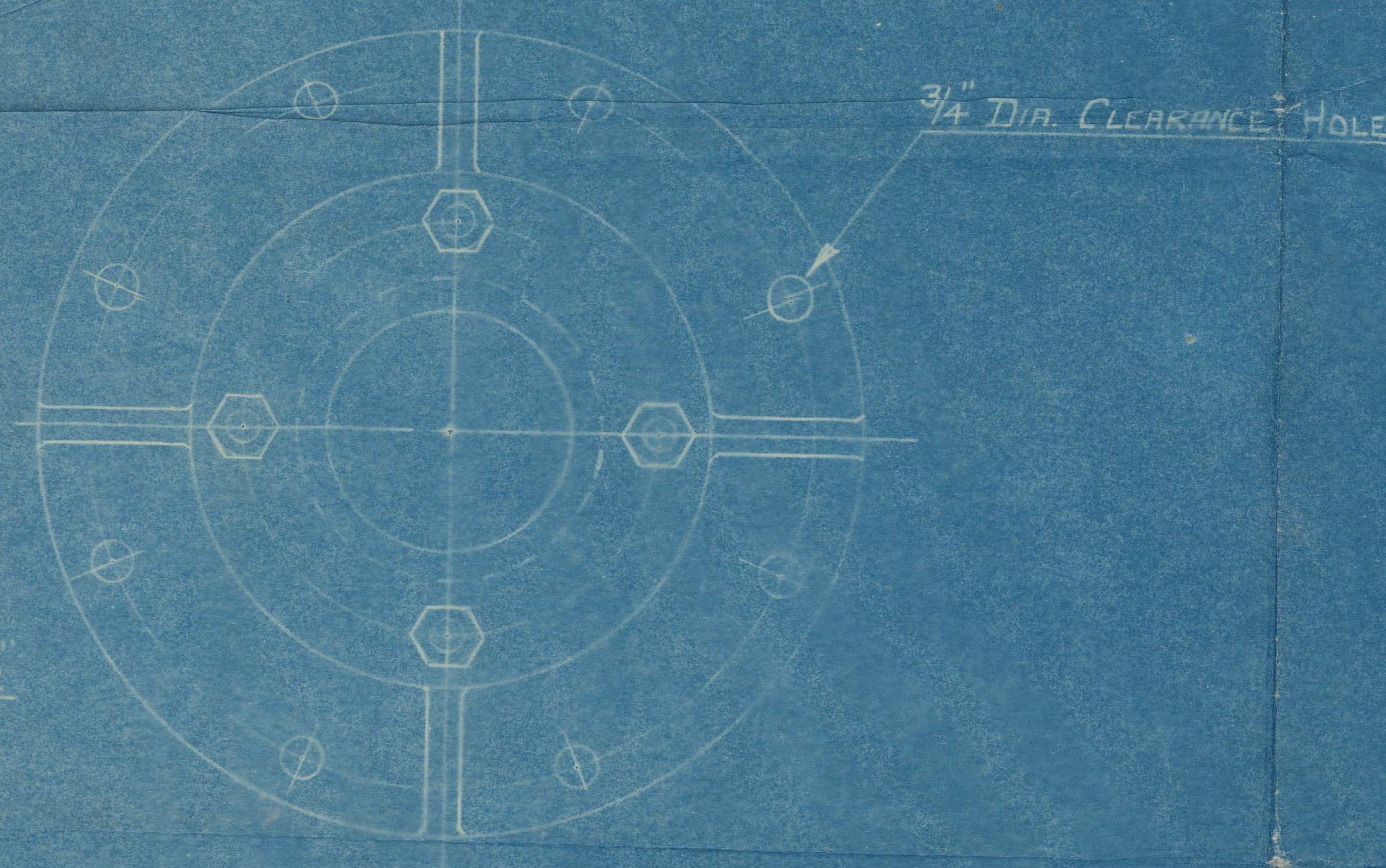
DETAIL OF WELDING RUDDER PLATES TO STOCK
